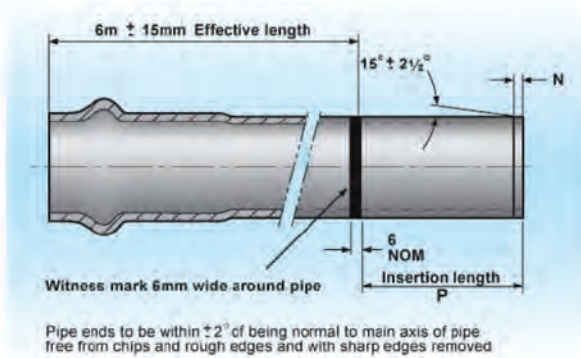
Typical pipe spigot details for rubber ring joint pipes.
